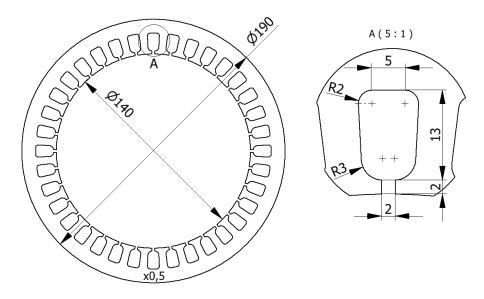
Dimensions of a Stator Sheet and Stator Slots of Main Drive Motor
